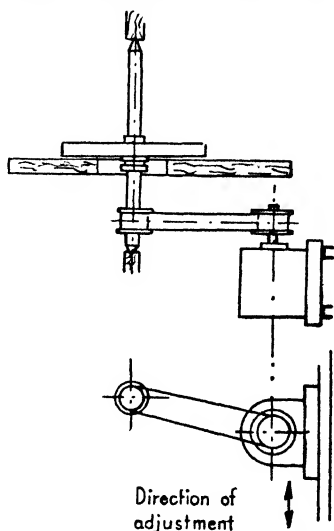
Motor arrangement with vertical spindle, avoiding the twisting of the belt; in this case endless V-belts can also be used
